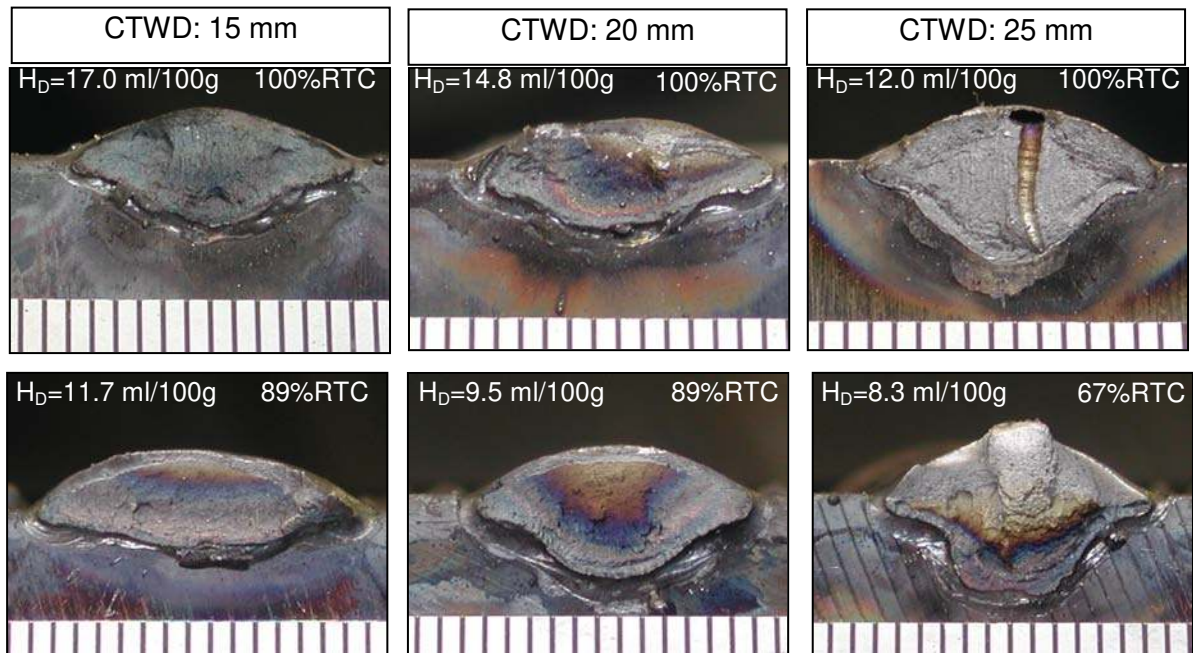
9 Photographs showing the G-BOP fracture faces of H10 weld metal deposited at CTWD of 15, 20 and 25 mm with preheat temperature of 20 °C using (top row) 75Ar-25CO<sub>2</sub> and (bottom row) CO<sub>2</sub> shielding gas and welded using welding current of 320 A.
